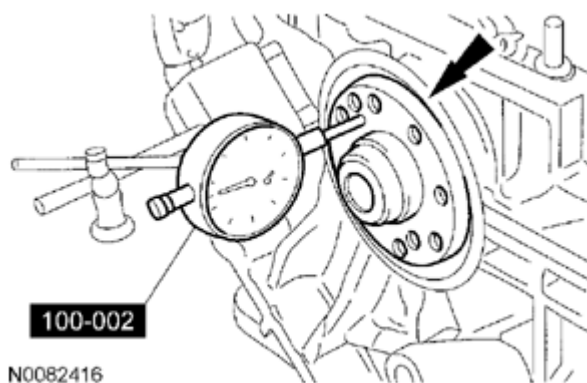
Measuring Crankshaft End Play Using Dial Indicator Gauge With Holding Fixture
